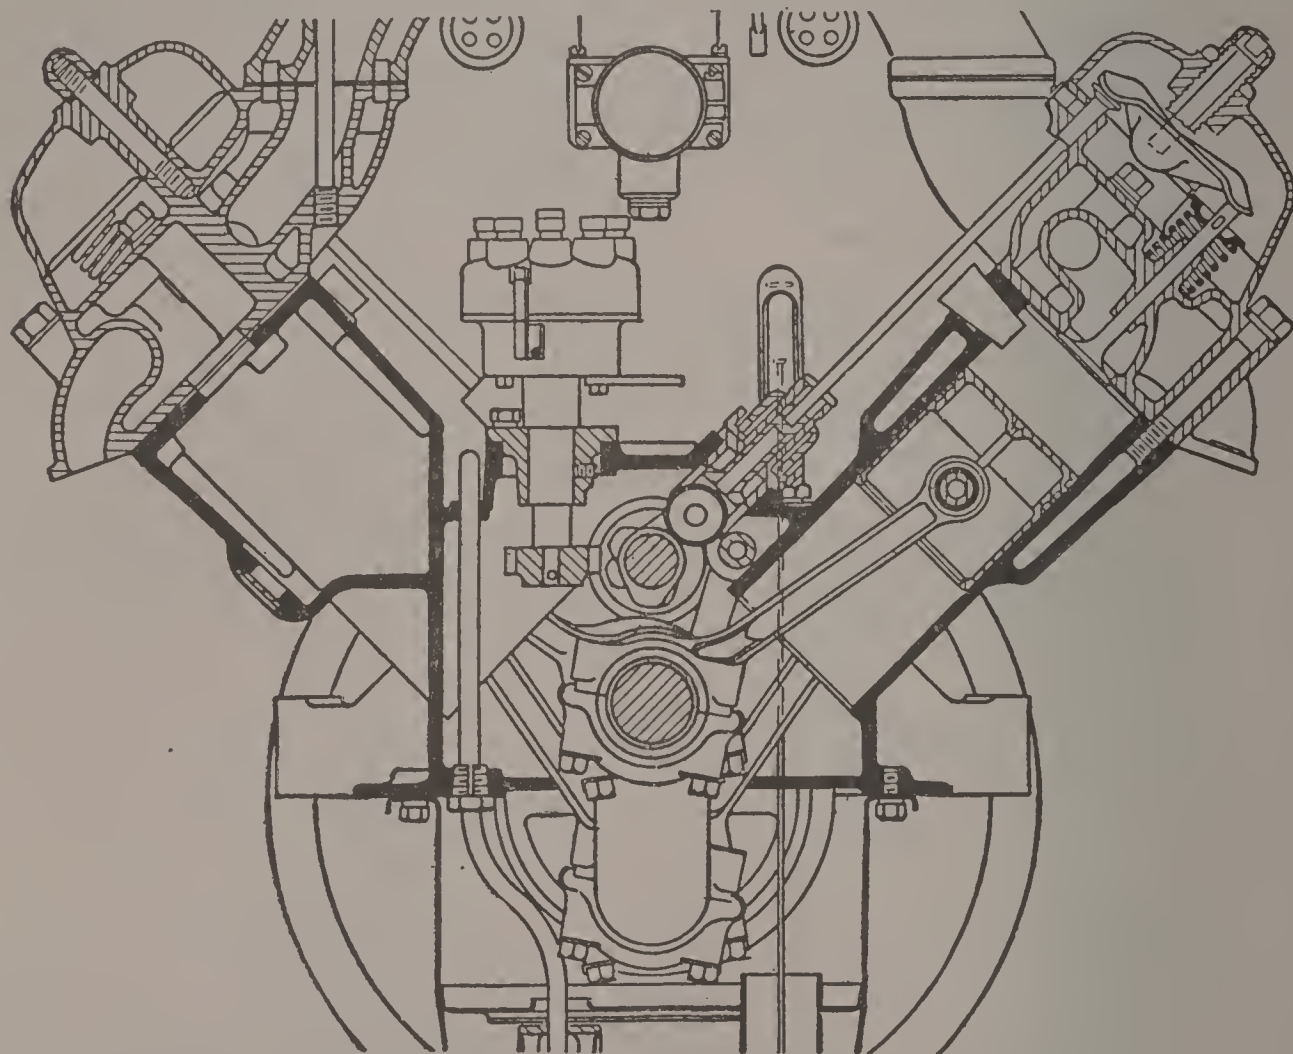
Section through Briscoe Eight, Showing Camshaft Arrangement
